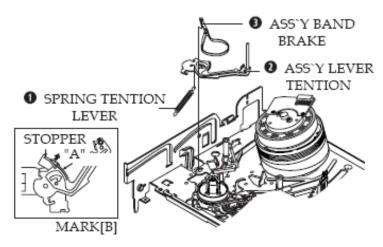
Ass'y Lever Tension , Ass'y Band Brake Removal
